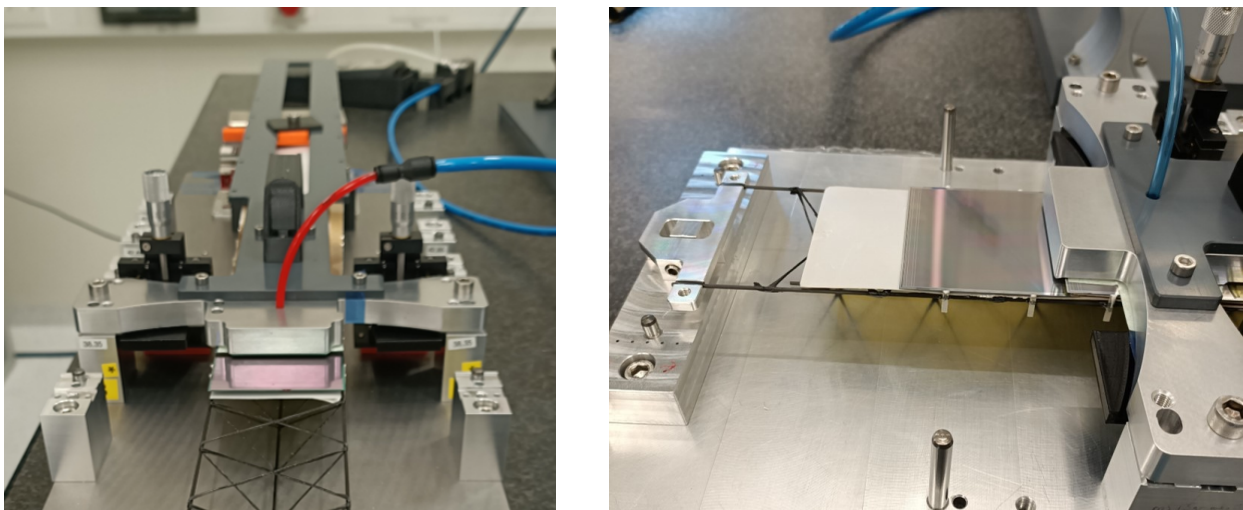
Module fixed under vacuum and mounted on the positioning blocks of the ladder holding baseplate: (Left) Front view and (Right) Side view.
